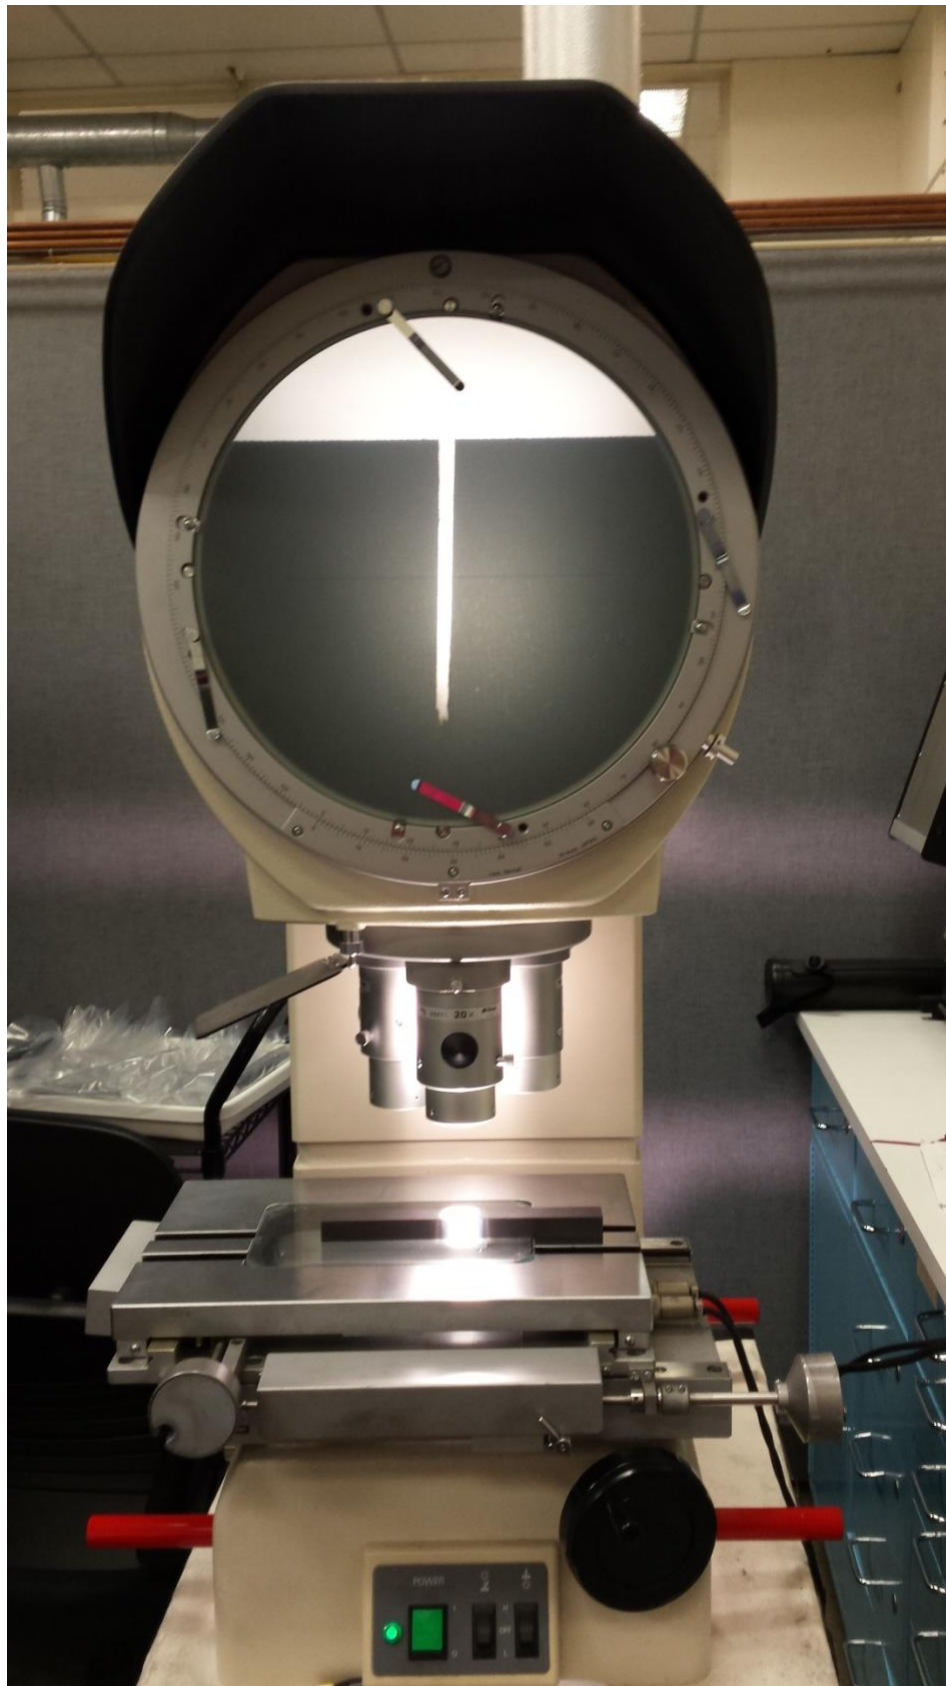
Profilometry technique used to determine notch dimensions and standard conformity
